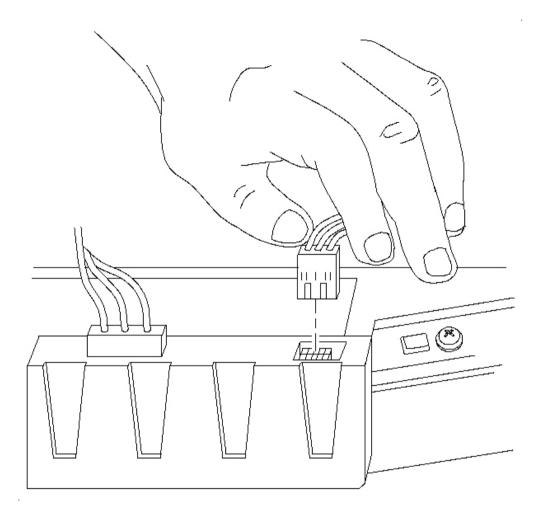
Disconnecting/Connecting Electrical Connector To Sunroof Control Module Courtesy of GENERAL MOTORS CORP.
